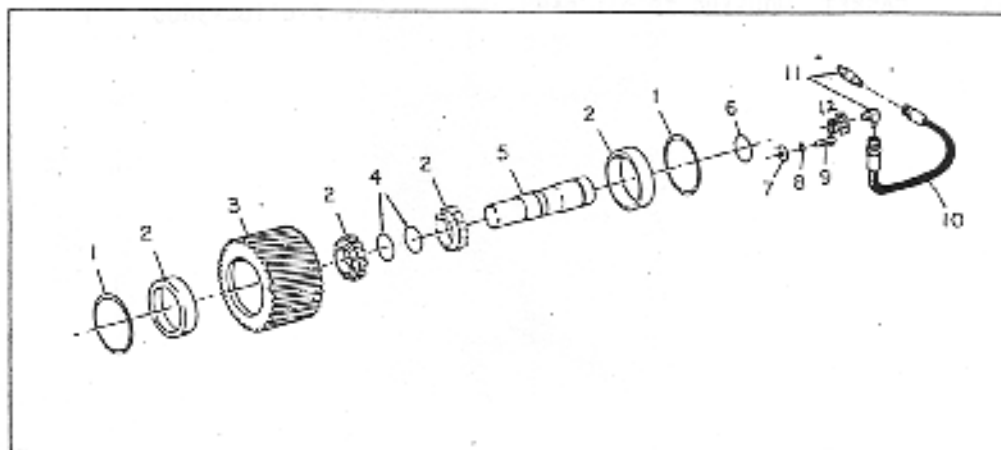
IDLER GEAR AND RELATED PARTS HY-6900
